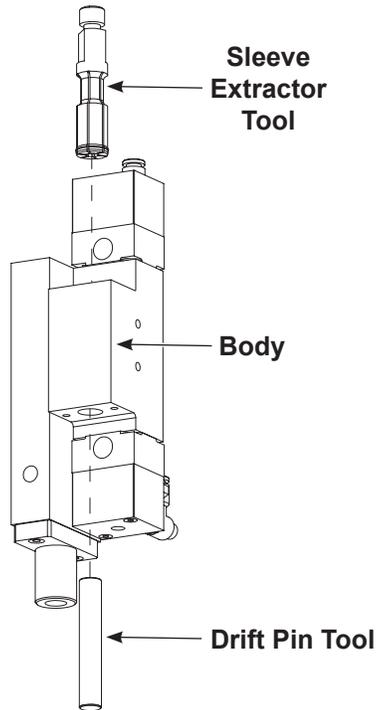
Removal of Proximity Cap, Piston, and Metering Cap Assemblies
